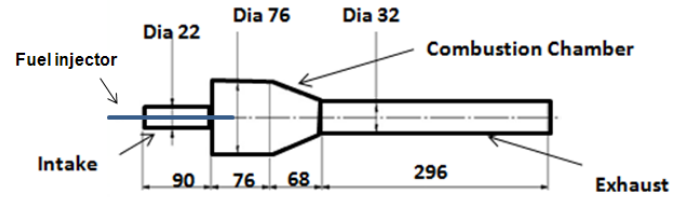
Inline intake valveless pulsejet engine with dimensions (Dimensions in mm)
